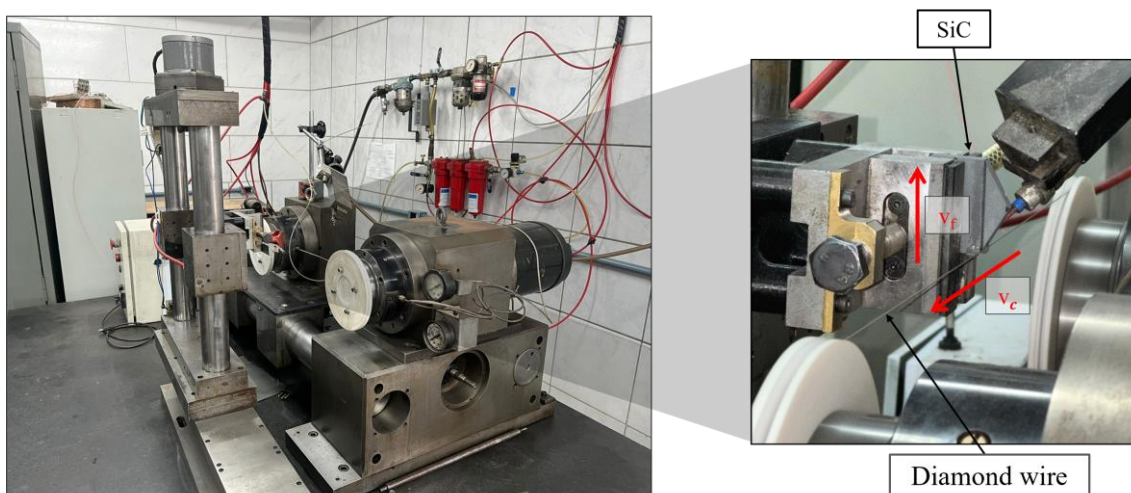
Diamond wire saw machine used for cutting silicon carbide samples.
